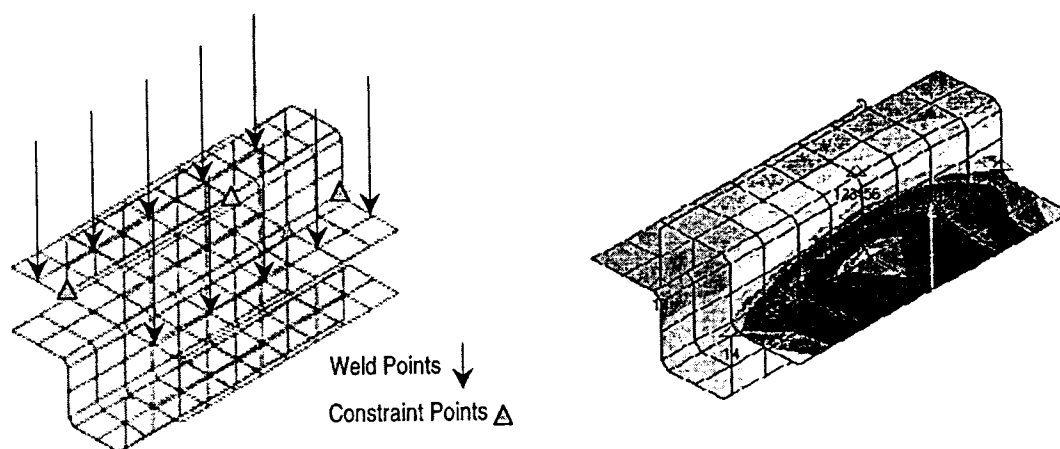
The assembly model of sheet metal welding and the resulting stress
